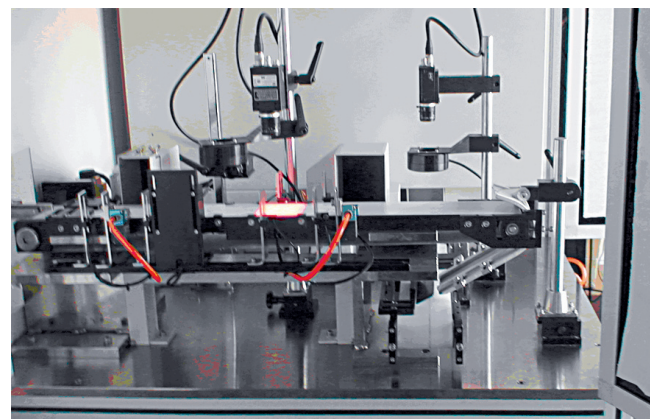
Inner structure of double-belt conveyor AOI sorting machine.
